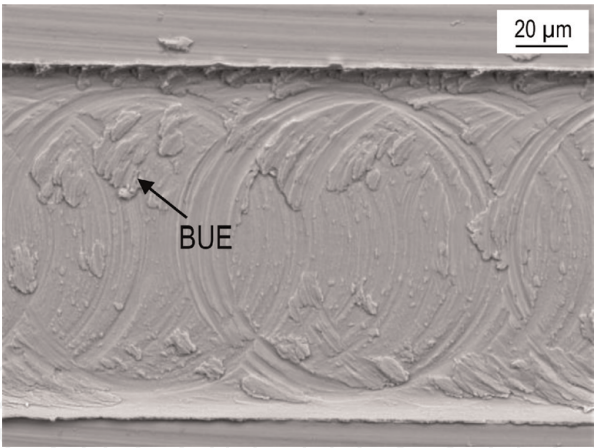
Built-up-edges deposit on machined Ti 6Al 4V surface. Micromilling at 9.6 m/min, 0.1 μm/tooth, 10 μm axial depth. Dry [18].
